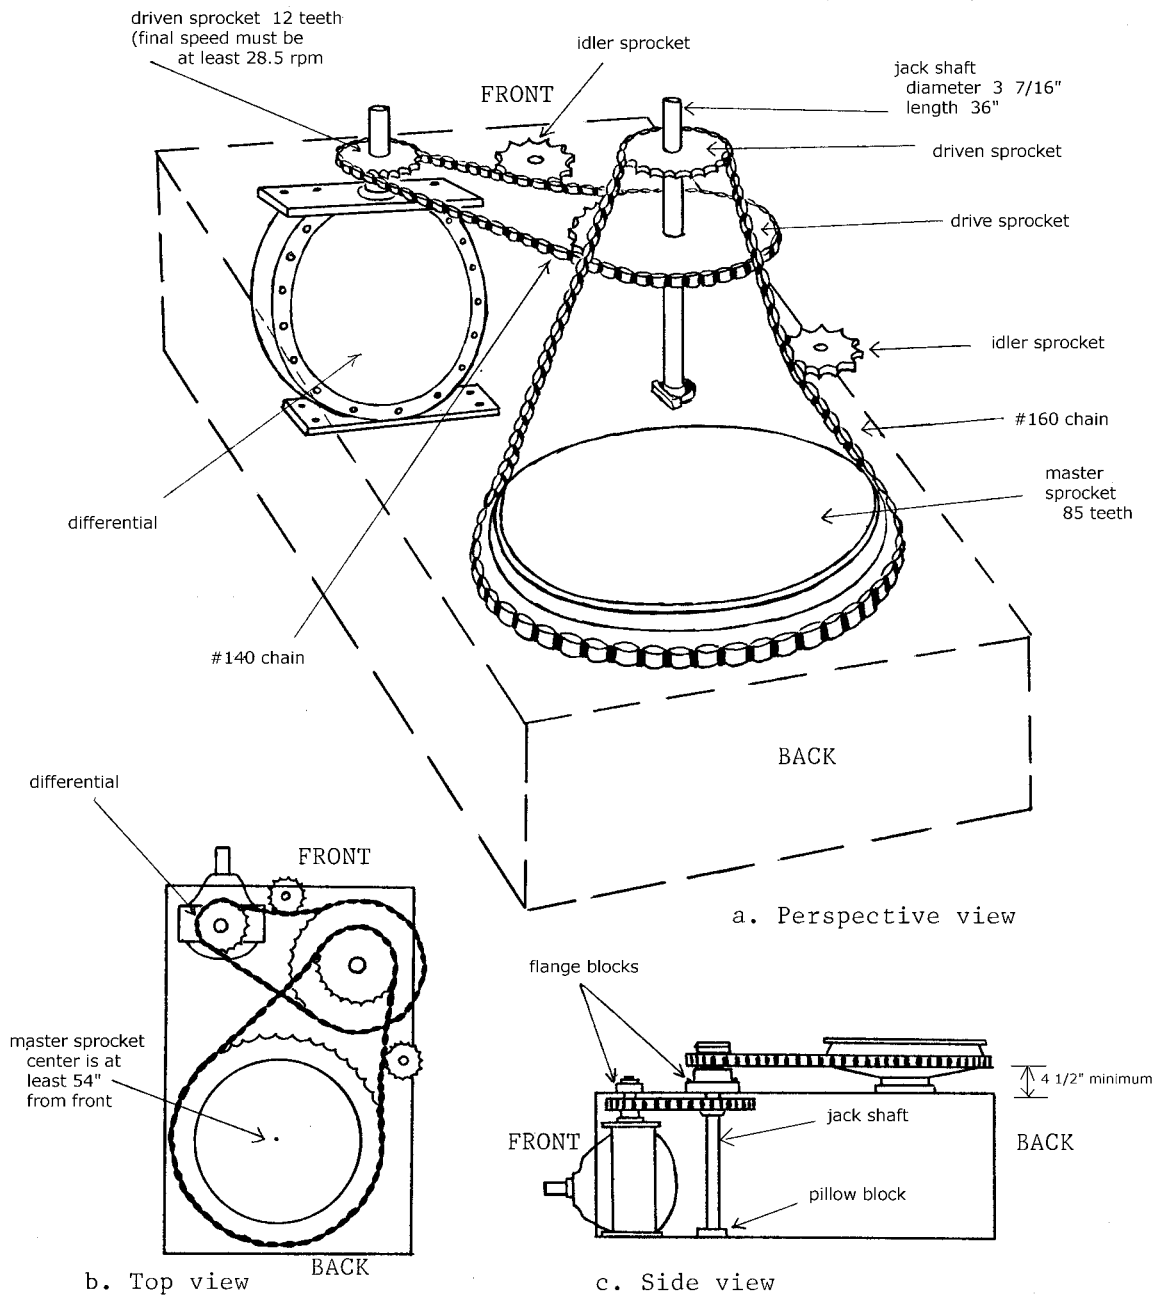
Jack shaft is fixed into pillow block which is bolted to back side of bottom angle iron. Cut 4" hole in top plate directly above this to allow shaft to extend above plate.
